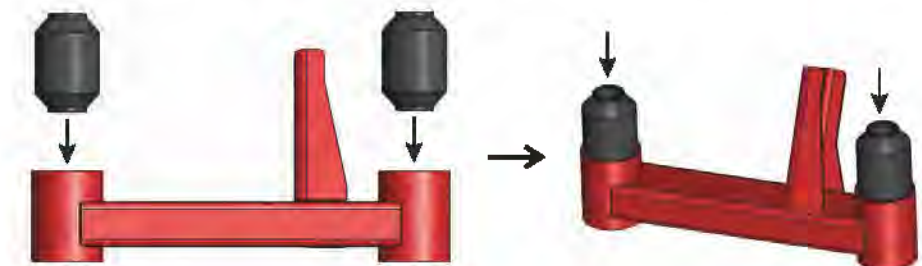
Check the height of rubber bush face to beam tube face within 4.5 to 6.5 mm
